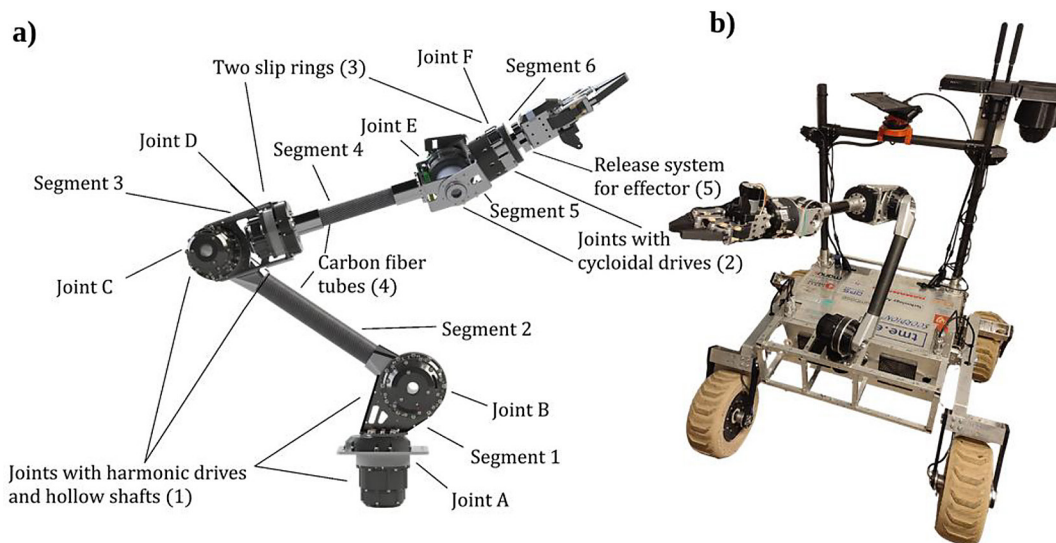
(a) Side view of the manipulator, (b) photo of the rover with the manipulator
